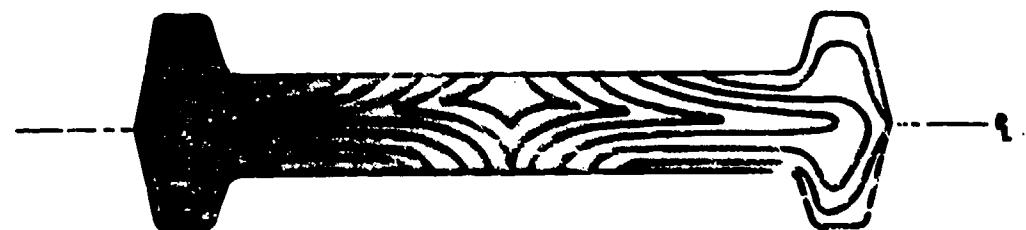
NONUNIFORM FLOW PATTERN IN A DISK FORGING WITH GOOD LUBRICATION ON TOP SURFACE AND POOR LUBRICATION ON BOTTOM SURFACE
